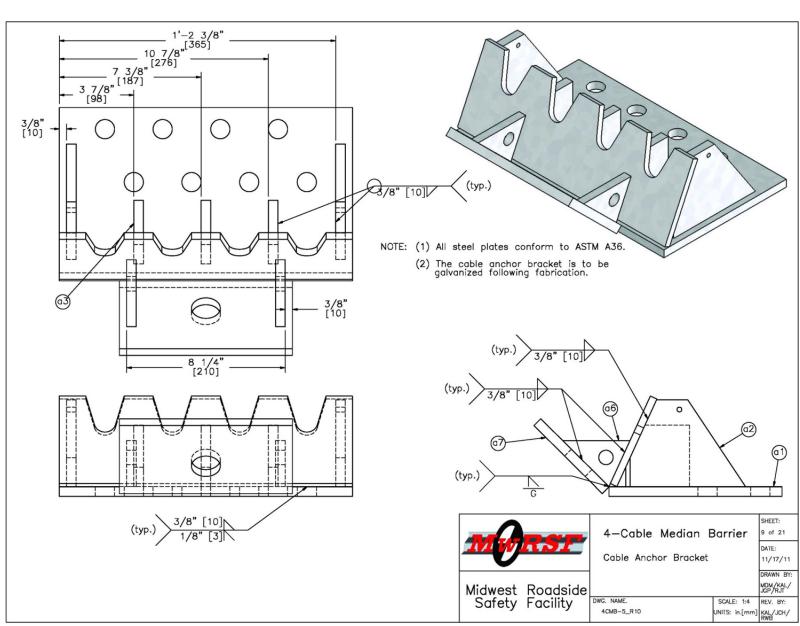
Anchor Bracket Details, Test No. 4CMB-5
